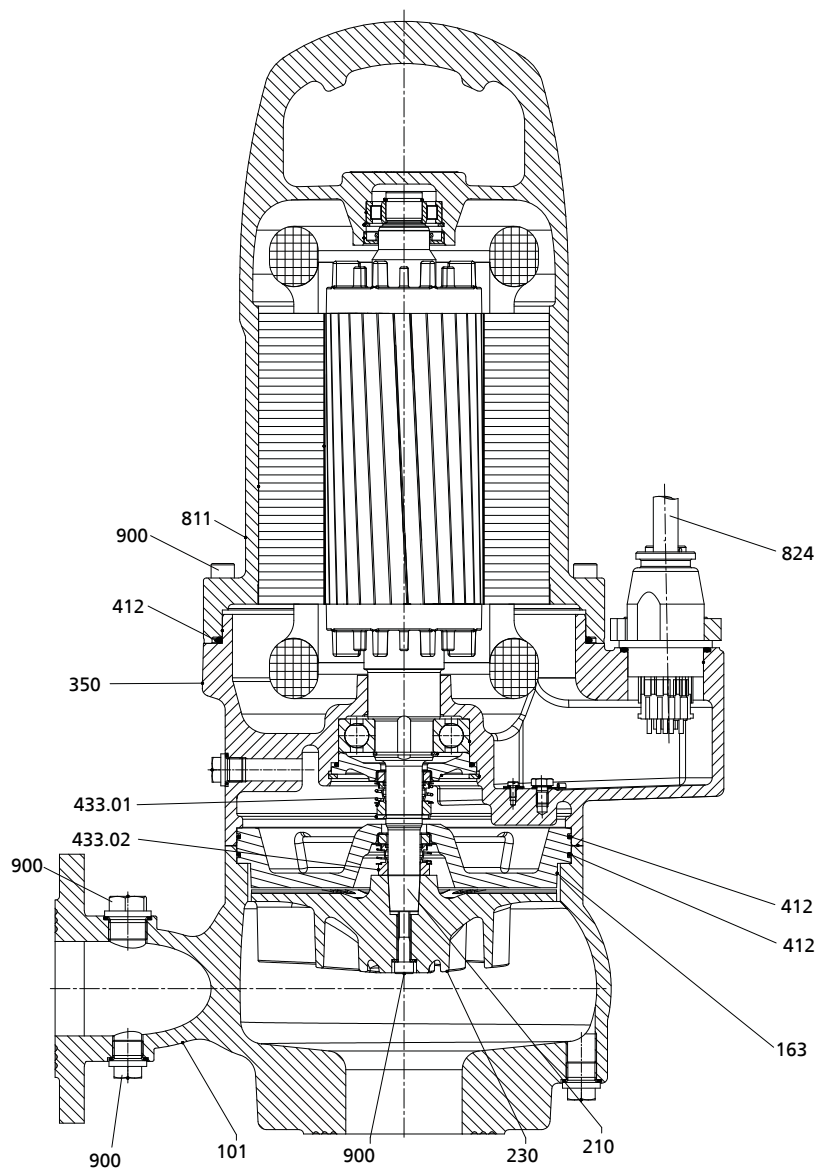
General assembly drawing, example: Amarex KRT F 65-215
